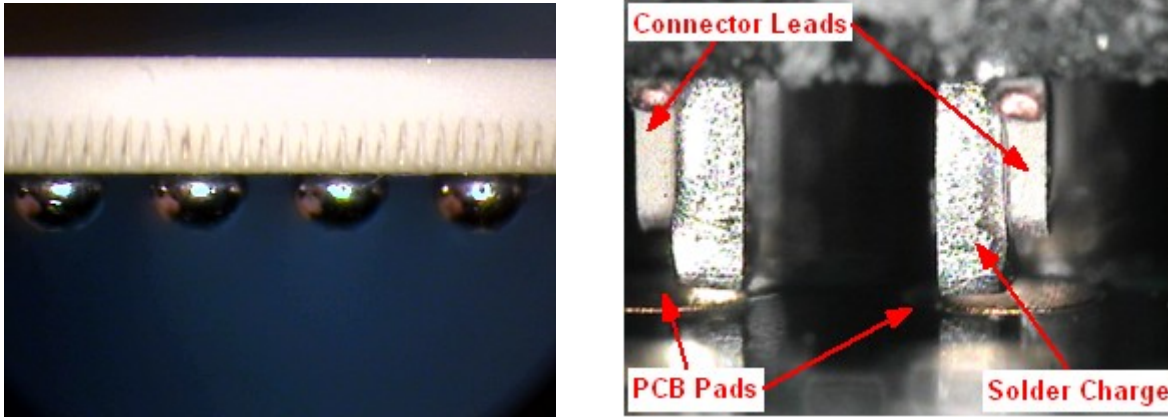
Solder Balls on BGA's v. Solder Charges on SEARAY™.
